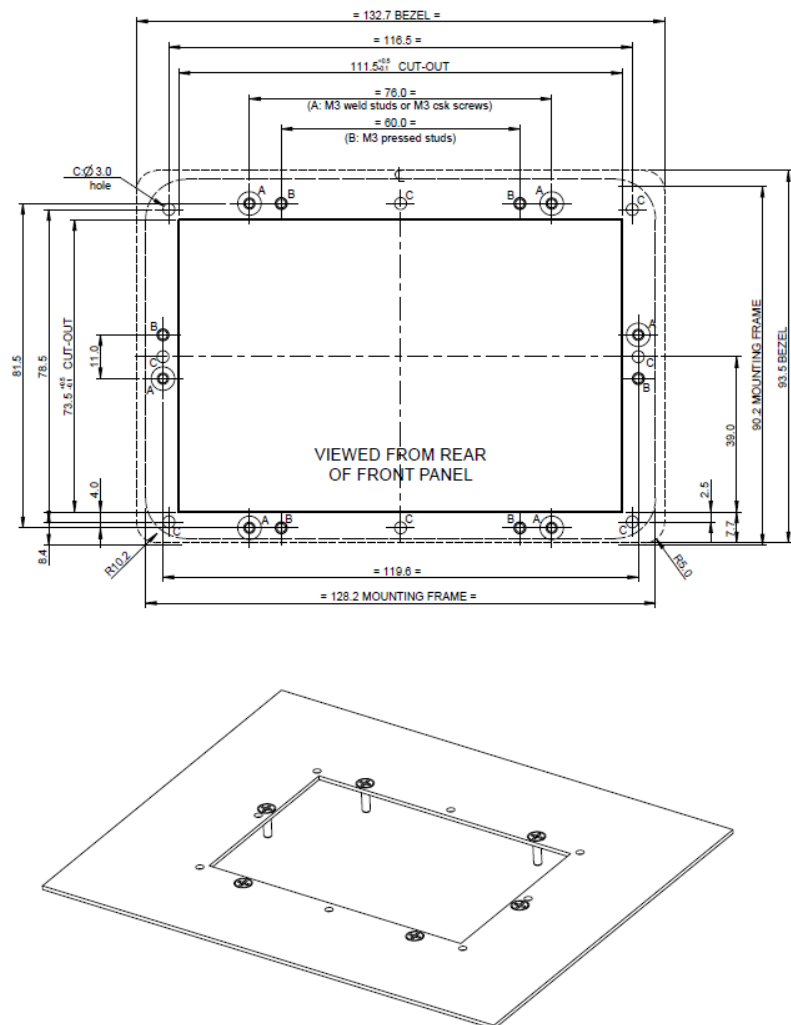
VM800B 3.5" panel mount dimensions
